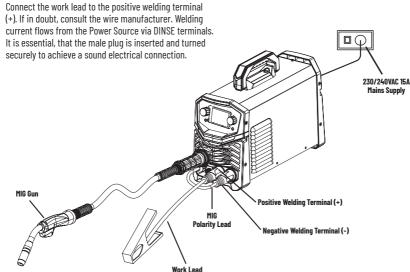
Setup for MIG Welding with Gasless MIG Wire
